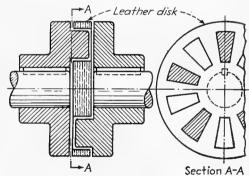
The principle of the T. B. Wood & Sons Company coupling is the same as Fig. 272, but the driving lugs are cast integrally with the metal flanges. The laminated leather disk is punched out to accommodate the metal driving lugs of each flange. This coupling has flexibility in all directions and does not require lubrication.
